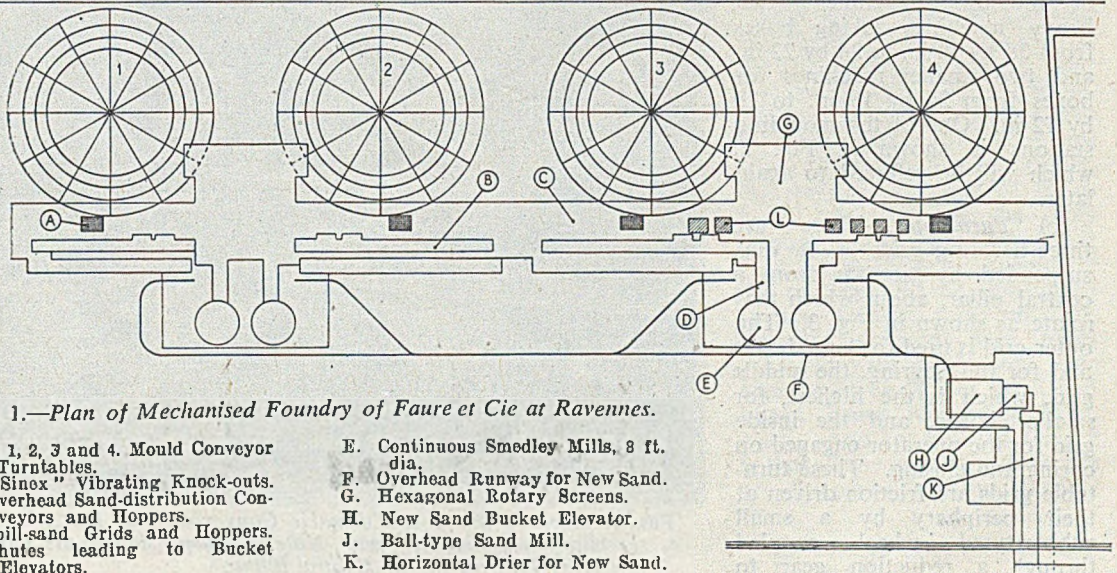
Plan of Mechanised Foundry of Faure et Cie at Ravennes.
